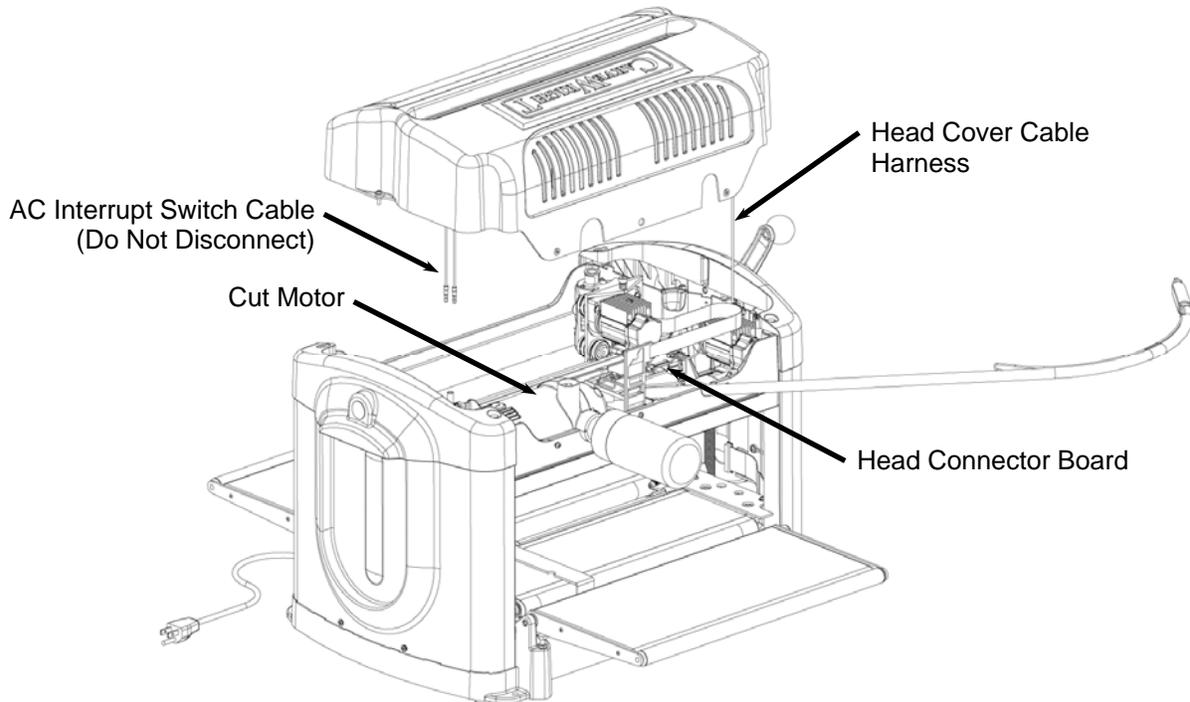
EXPLODED VIEW OF THE LIFTED COVER
